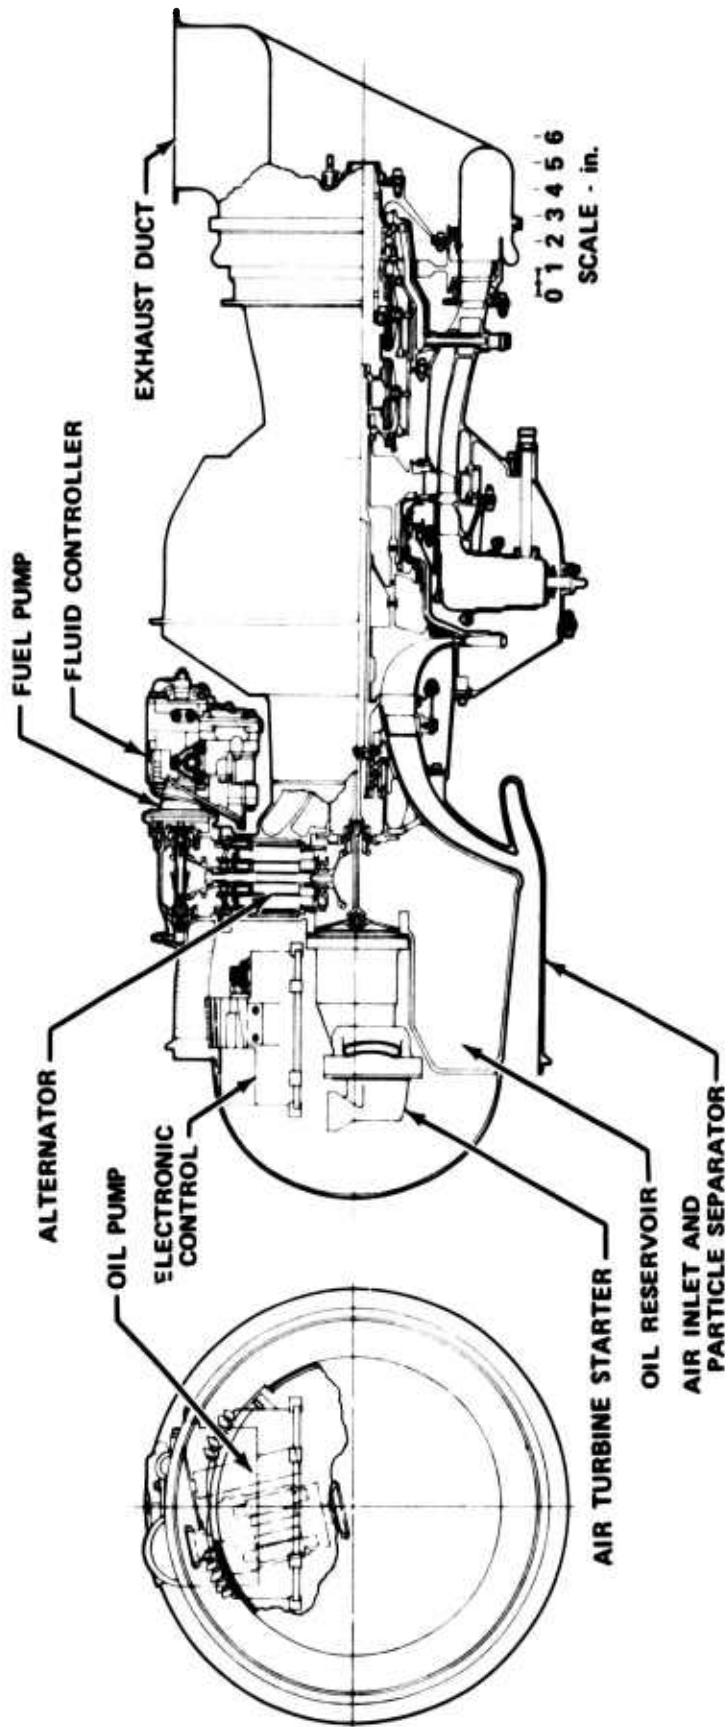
Tower Shaft/Air Turbine Starter Candidate
